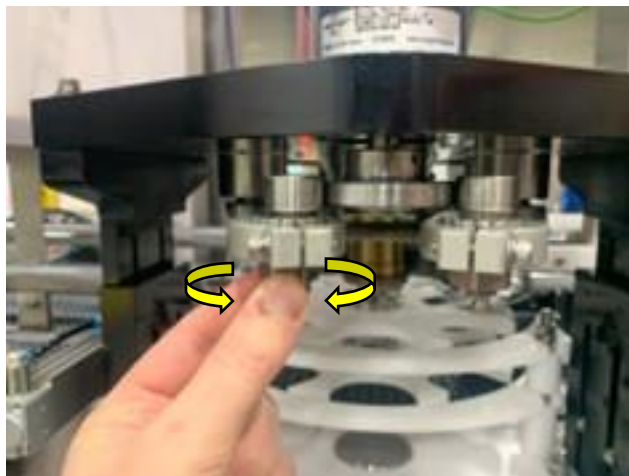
Rotate Cam Follower using Hex Nut at the bottom of the arm
